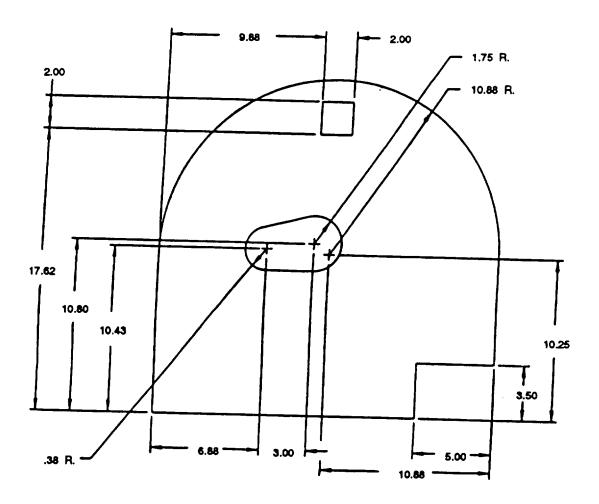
Acoustical Foam, Sound Enclosure, Rear Panel Assembly
